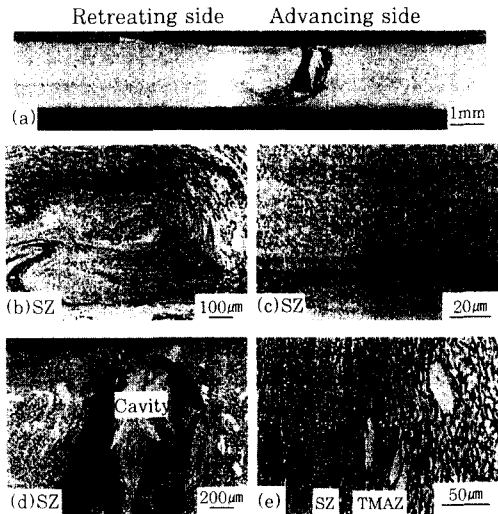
Macro and microstructure of cross-section of Thixomolded AZ91D FSW joint at tool rotating speed 1240rpm and travel speed 500mm/min
